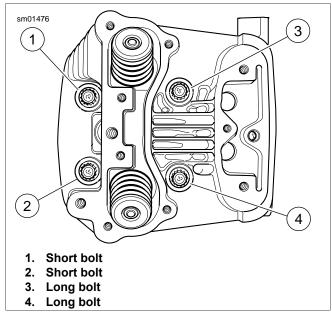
Front Cylinder Headbolt Torque Sequence
